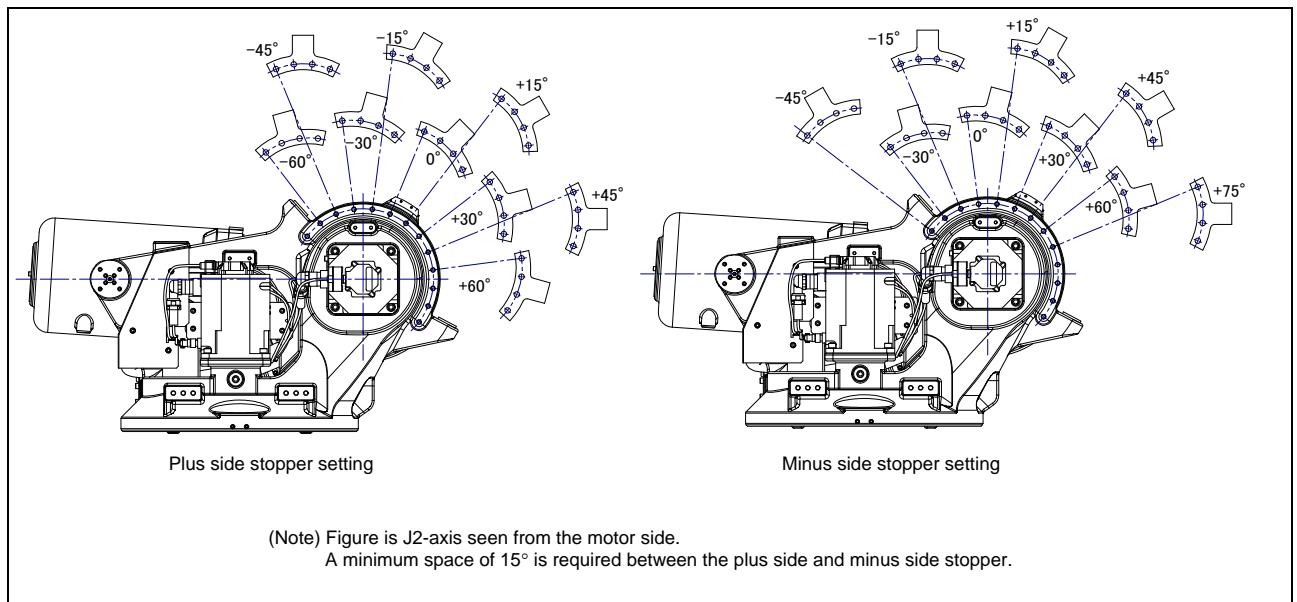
(o) Mounting the J2-axis adjustable mechanical stopper (2/2)
